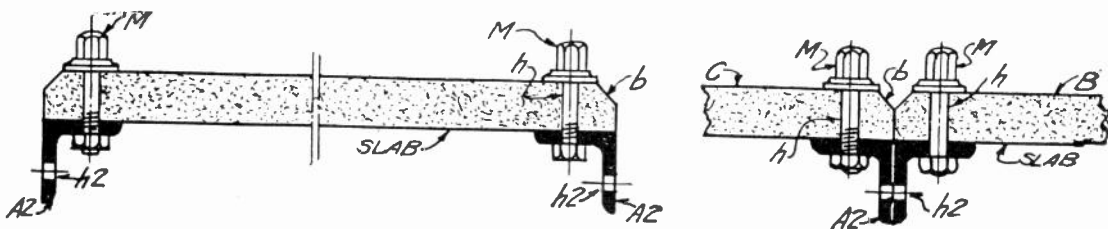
The above sketches show the method of attaching switchboard panels to the angle iron frame work. Note how the panels are bolted to angle irons, and the angles bolted together between panels. Also note the type of bolts, nuts, and washers used with this construction.
